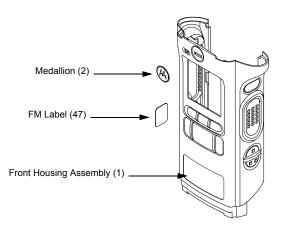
Main Housing Assembly (Dual Display Version, Limited Keypad)
